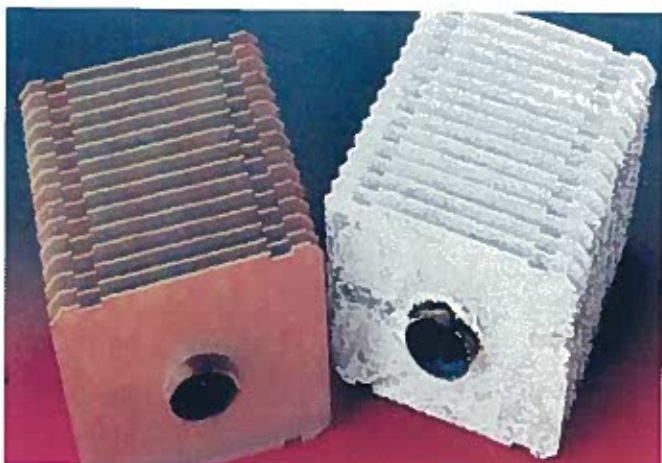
Coils exposed to Salt Spray Test as per ASTM B117.85 for 360 hours; corrosion on the untreated coil would shorten equipment
